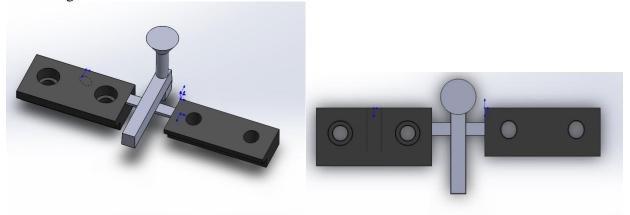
Prototype casting full assembly model (4-8-3 method) in orthogonal and top views.
